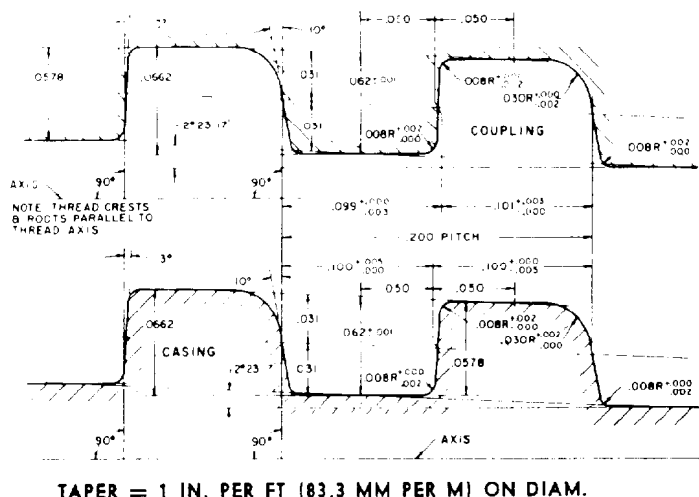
Casing and tubing round-thread form. Buttress casing thread form and dimensions for sizes 16 in. and larger.
